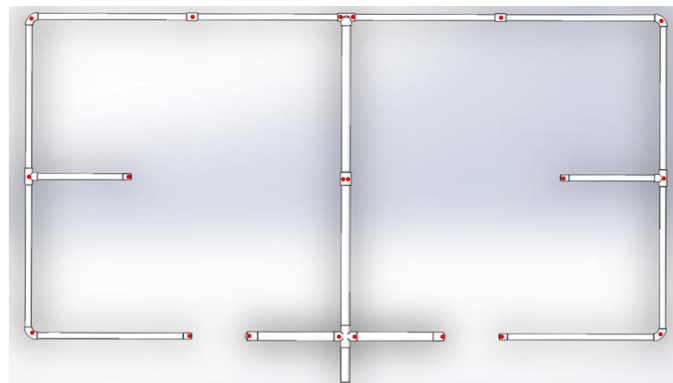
Frame, Center Axis Piping Shape, Attachments; Red Dots indicate Velcro Location
